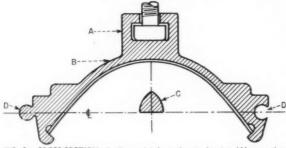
CROSS-SECTION of all-metal infra-red unit showing (A) mounting channel; (B) extruded aluminum body with Alzak parabolic reflector; (C) Chromalox, Iconel sheathed metal heating element; and (D) tongue and groove for lengthwise interlocking to form tunnel.
